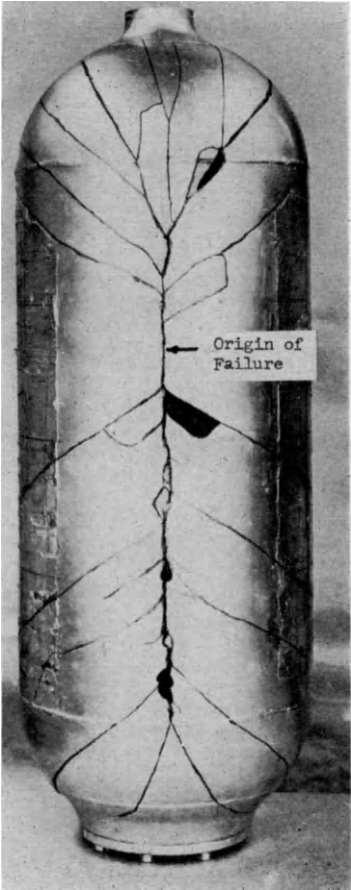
Appearance of cracks produced by bursting a vessel.
